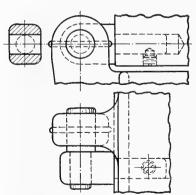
Separable lugs are used when the casting is too large for small lugs to cast satisfactorily.
